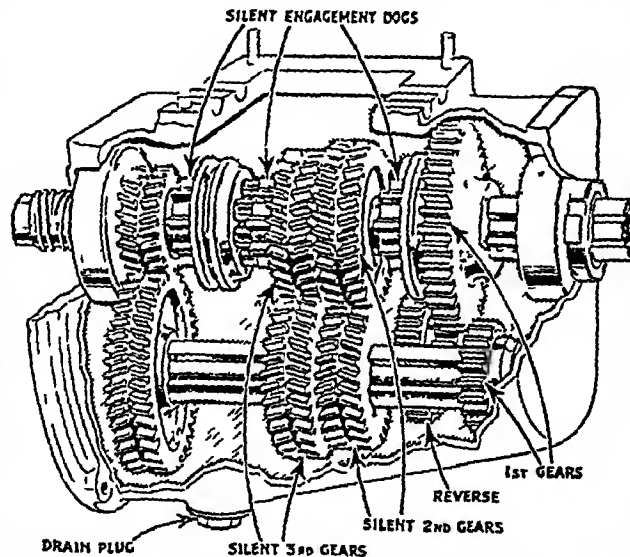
Gear-box arrangement of a modern 14 h.p. car. It will be seen that helical gears are incorporated for both second and third speeds.
